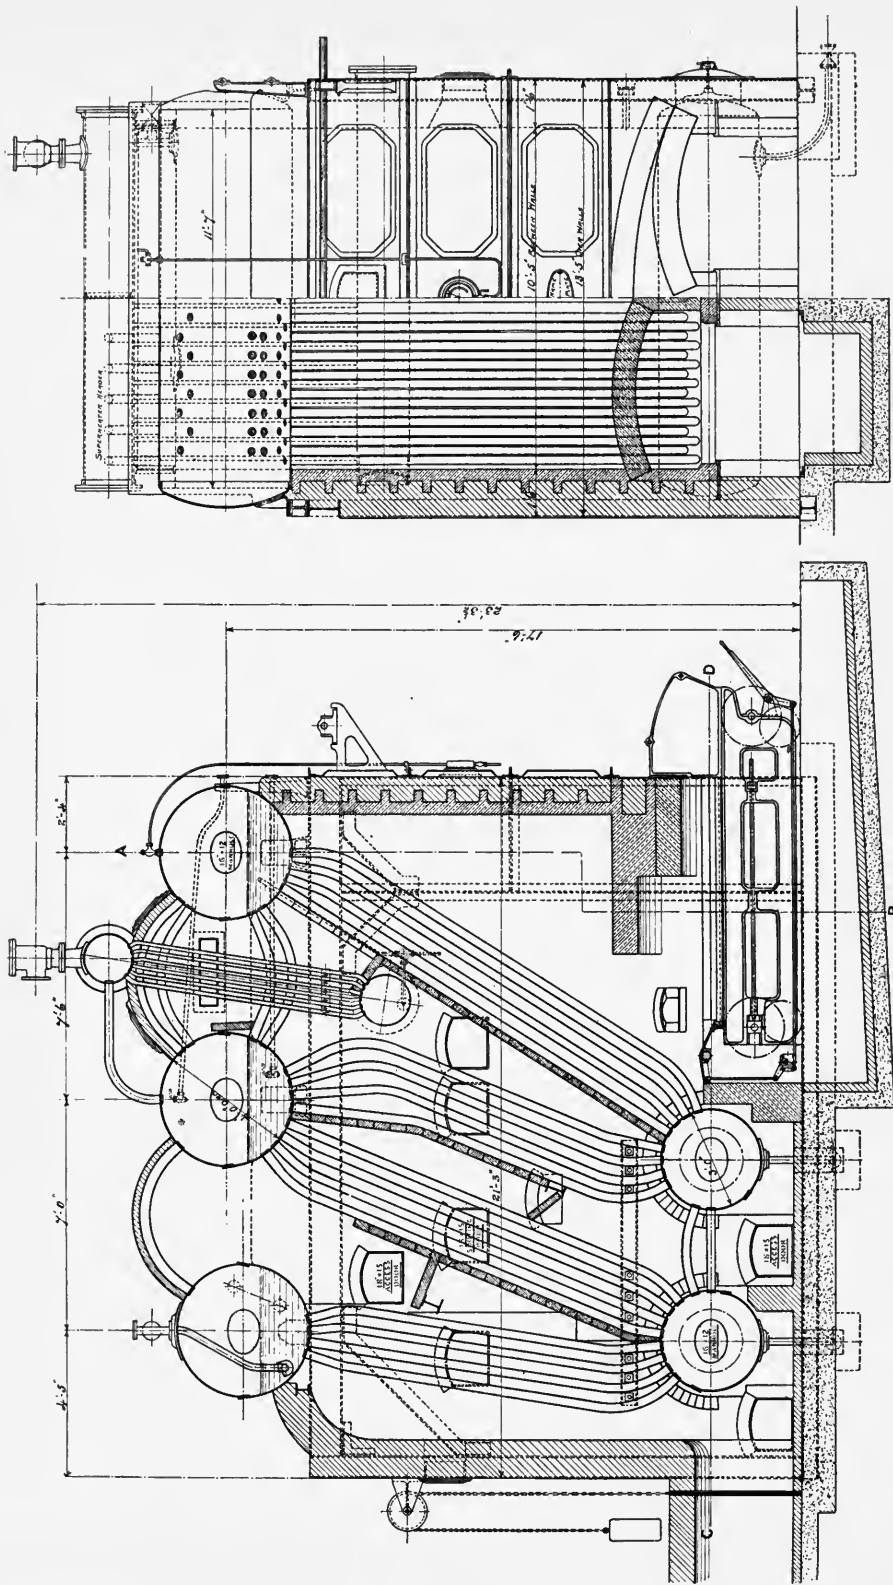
Five-Drum Stirling Boiler. Sectional Views.
